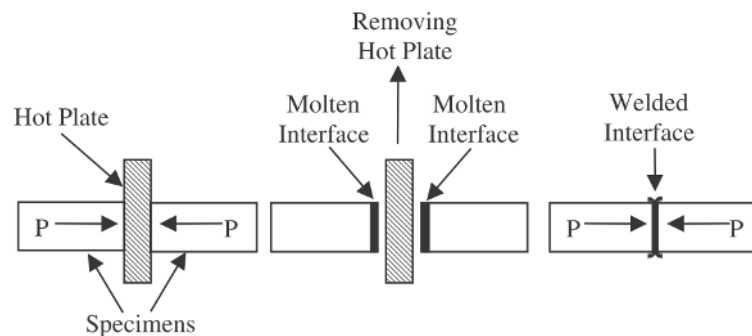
Schematic of the hot-tool welding [33]
